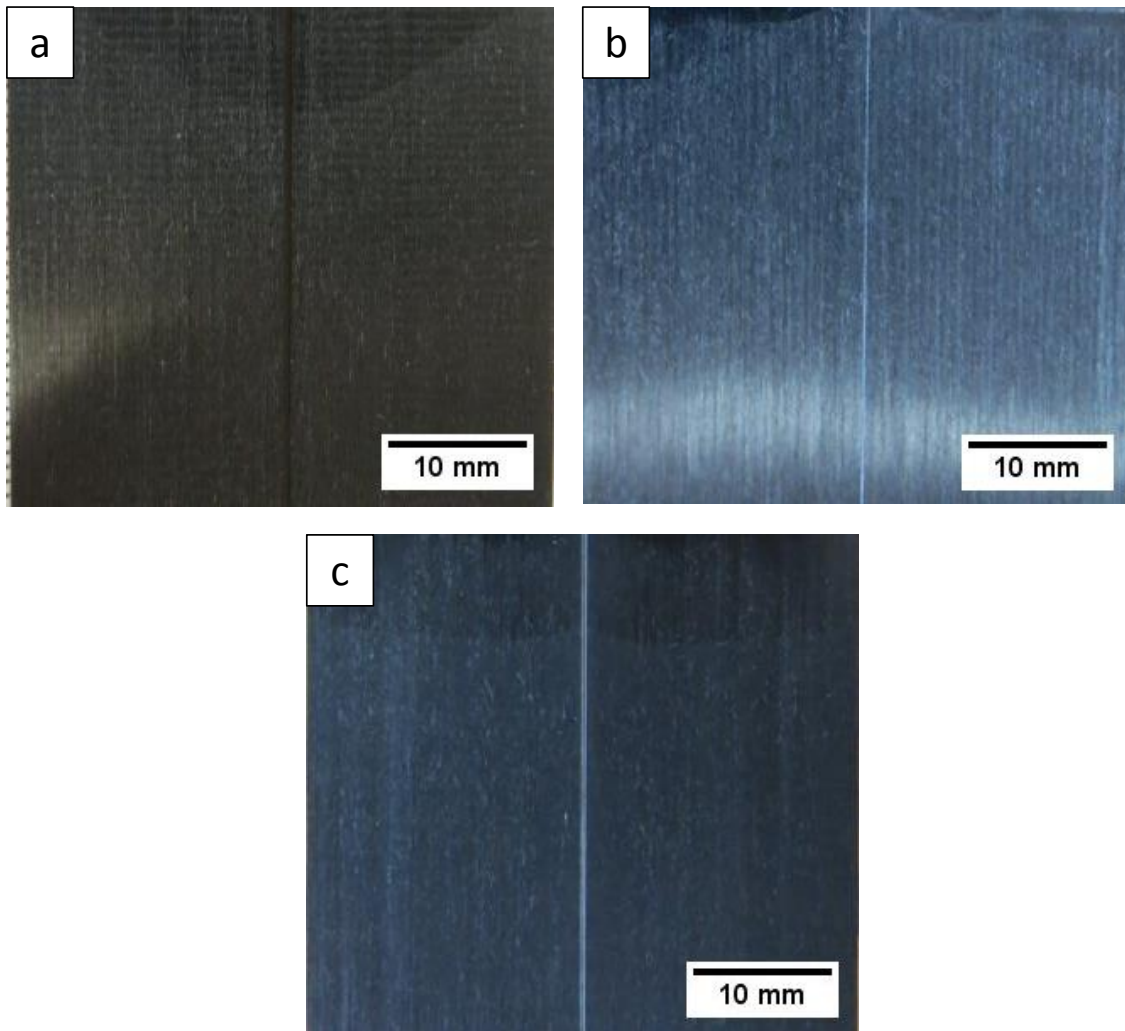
DCB tested fracture surfaces with PMMA deposits and without printing. (a) horizontal lines ( $dx/dy = 0.1/0.8$  mm); (b) vertical lines ( $dx/dy = 0.8/0.1$  mm); (c) NP .
